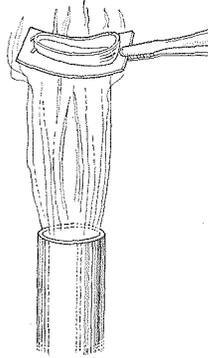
Soldering the Band and Disc. Notice Two Small Pieces of Solder on Opposite Side from Plier Beaks. One Piece Is Usually Sufficient
